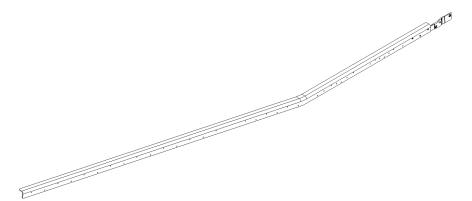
STC design showing the Reinforcement Angle crack area replaced with STC reinforcement angle splice installed
